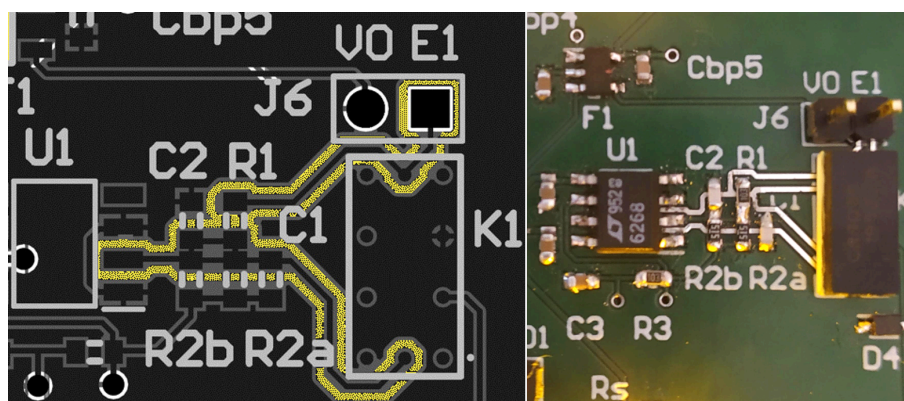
On the left: PCB zoomed footprints circuit with the yellow-highlighted guard ring path. On the right: zoomed PCB picture. It is possible to see the filled copper shape pathway.
